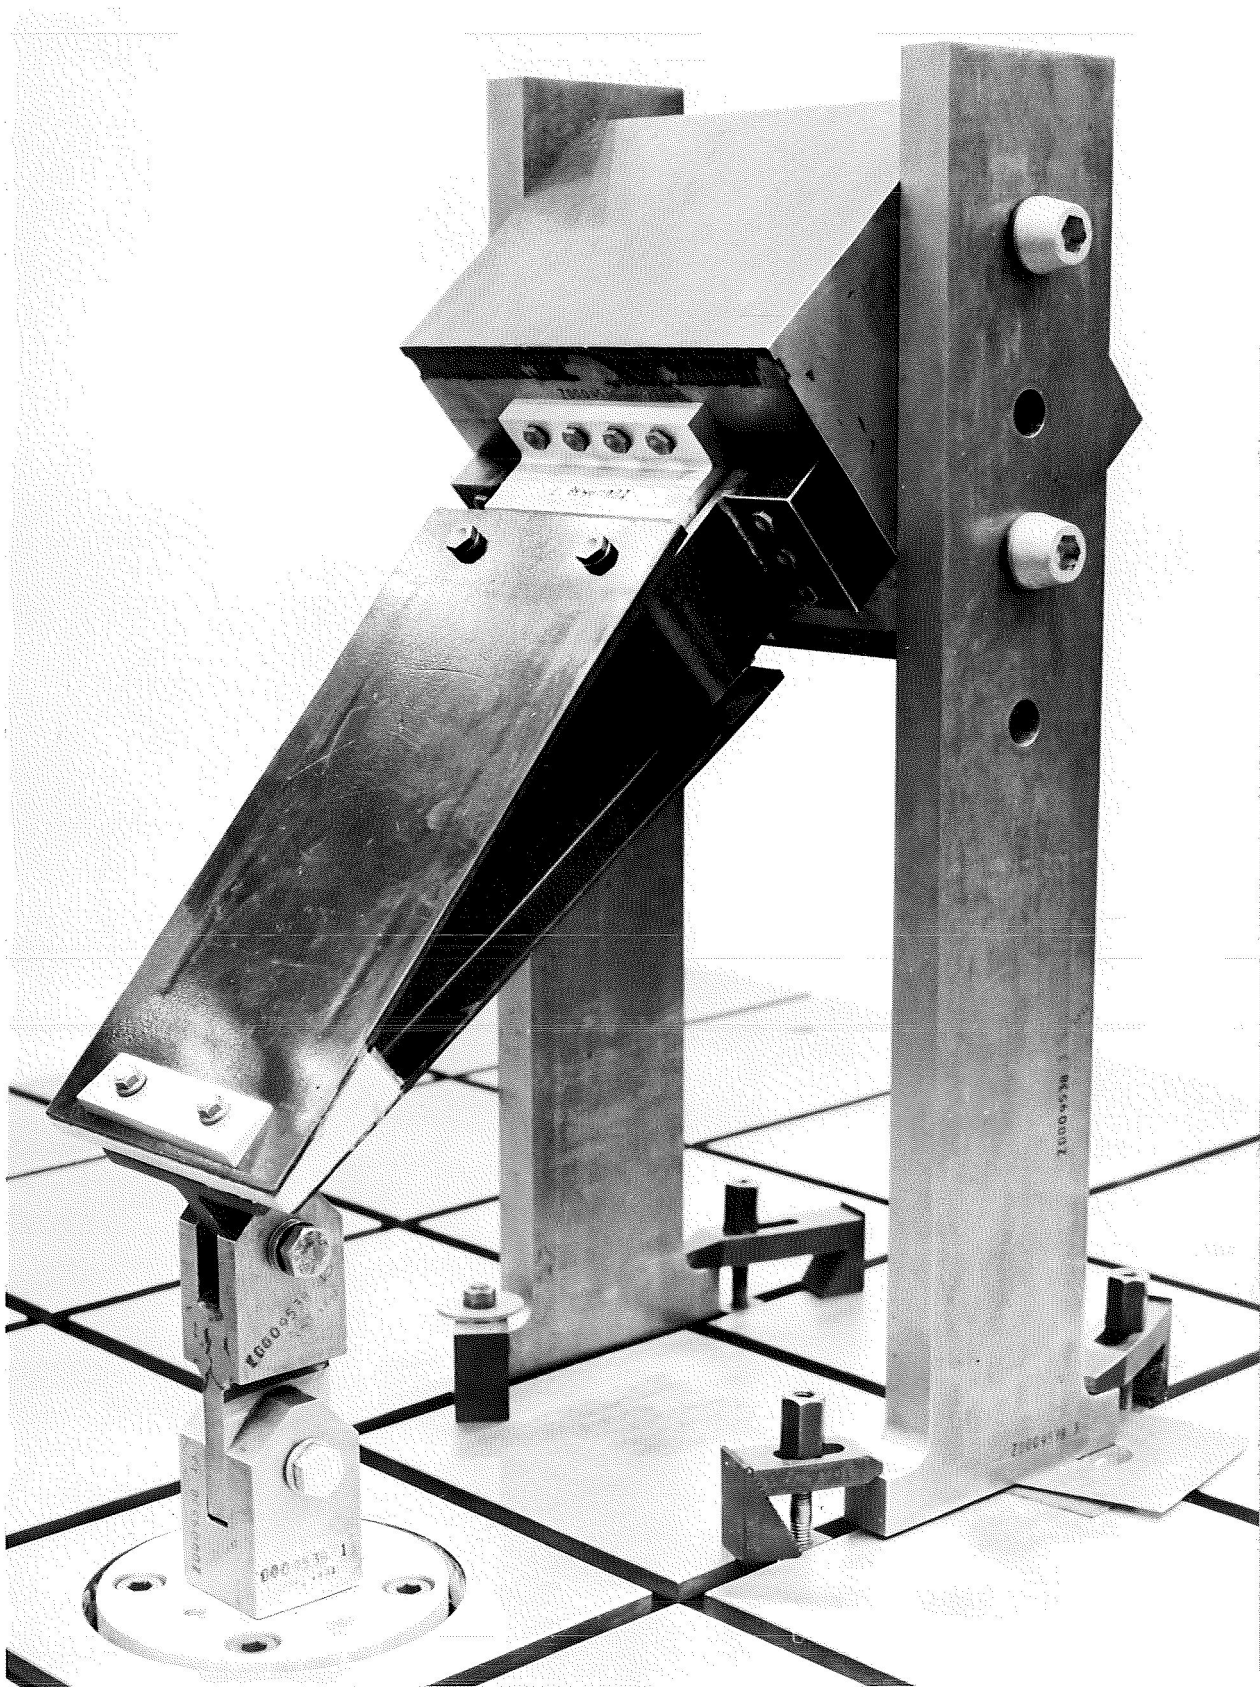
HINGE FITTING FASTENER TEST SETUP
